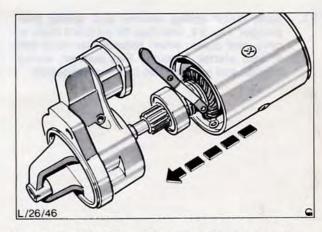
Assemble drive end housing to armature and yoke assemblies
